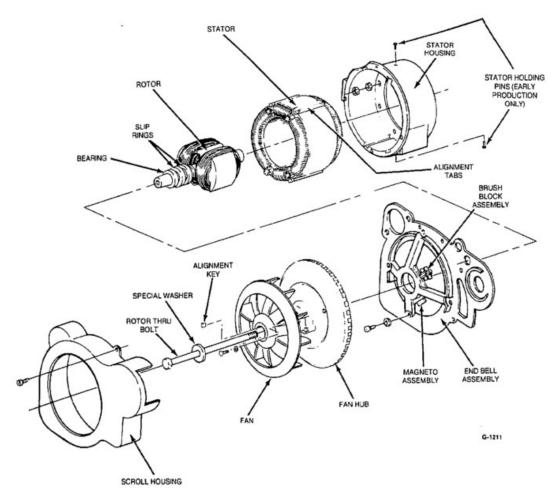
Schematic from Service Manual showing Fan, Rotor, Stator, Magneto etc assembly
